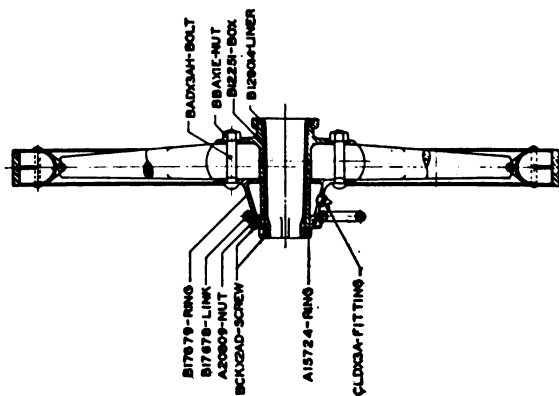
Wheel, 20-inch, M4, assembly.
